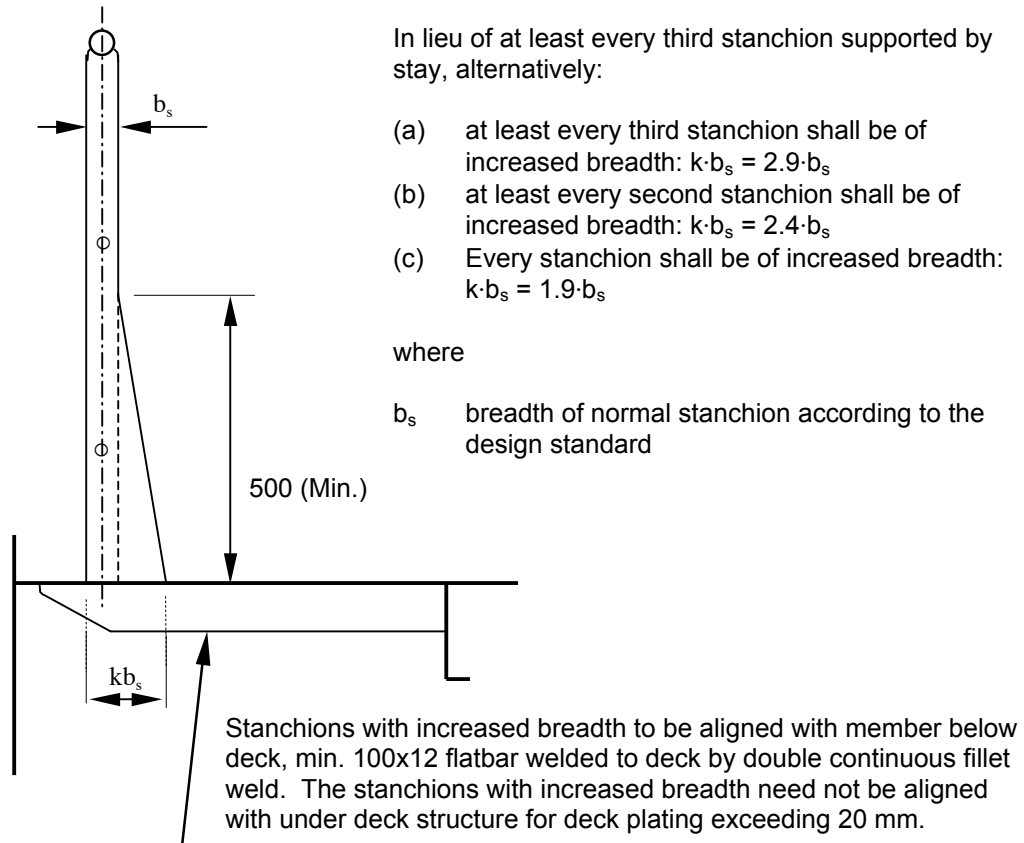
Guardrail stanchion of increased breadth, welded to deck with double continuous fillet weld with leg size of min. 7 mm or as specified by the design standard.
